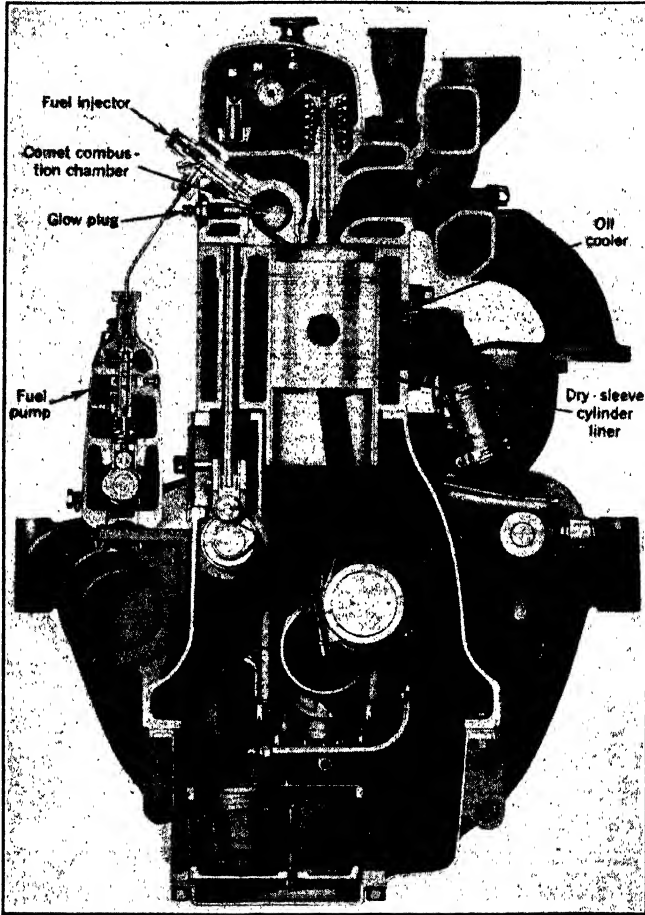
Waukesha-Comet high-speed Diesel engine; section through cylinder, valve mechanism, spherical combustion chamber, Bosch fuel pump and injector, and glow plug for starting.
